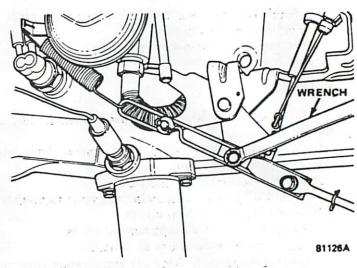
C-28 Throttle Linkage Adjustment-Six-Cylinder Engine
